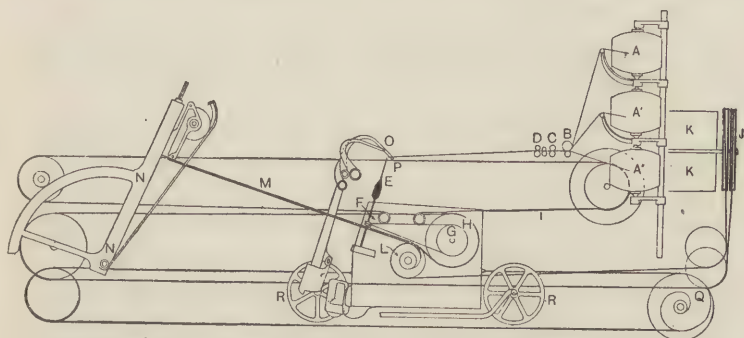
B.—Worsted Mule Section.—*A, A₁, A₂*, French drawn rovings ready for spinning; *B*, jack drafting rollers; *C*, carriers; *D*, front drafting rollers; *E*, spindle carrying spun yarn; *F*, whar on spindle from which band passes to tin drum *G*; *H*, drum which conveys motion through the cord *I*, from the twist pulley *J*, in the headstock *K*, to tin drum *G*; *L*, a catch scroll which receiving a variable motion from the quadrant *NN*, through the chain *M*, gives the spindles the correct rotation to wind up the yarn for building a firm cop during the running in of the carriage at the same time that the faller wire *O* and counter-faller wire *P* direct and tension the winding up of the yarn, this being further controlled by the action of the “copping plate,” which controls the up and down movement of the faller wires.
